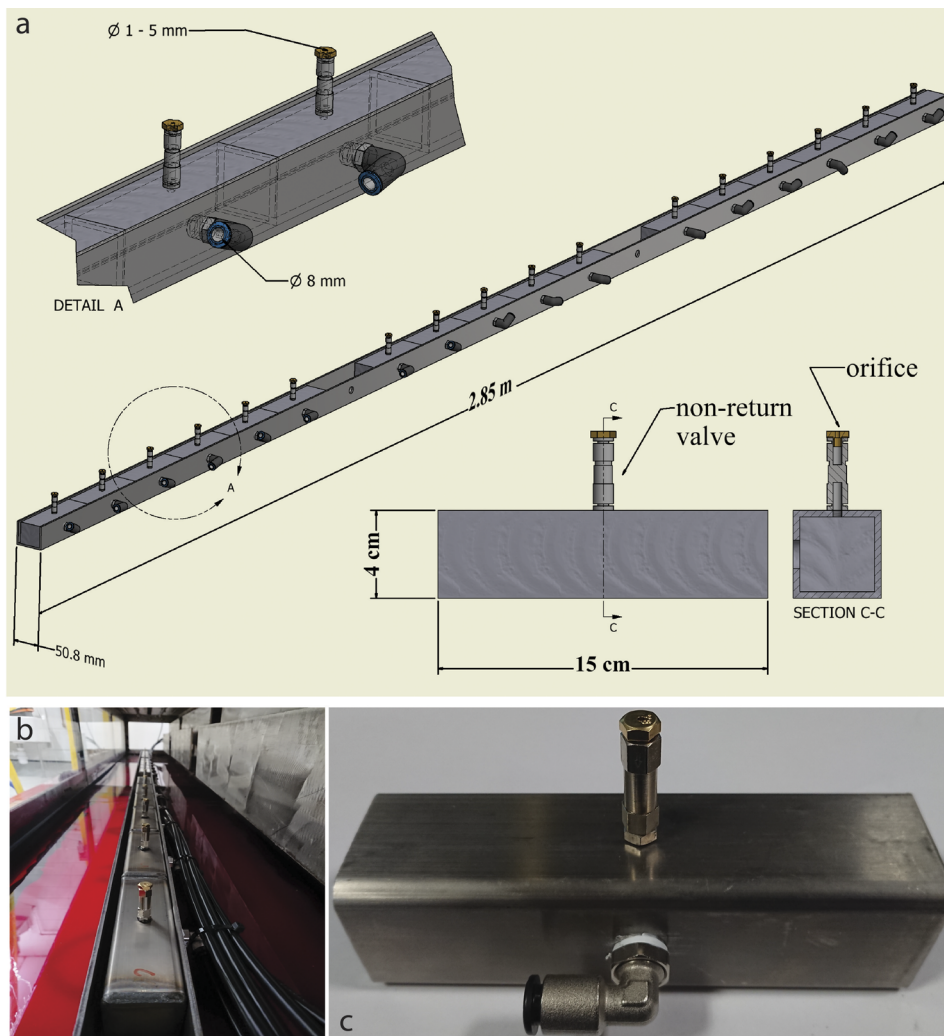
(a) Technical drawing of the bubbler, showing details of the modular design. (b) The bubbler installed in the bottom tank. (c) View of one of the 17 bubble modules, comprising a small air chamber assembled with an elbow push-in fitting connector, non-return valve, and a 1 mm orifice brass bolt.
